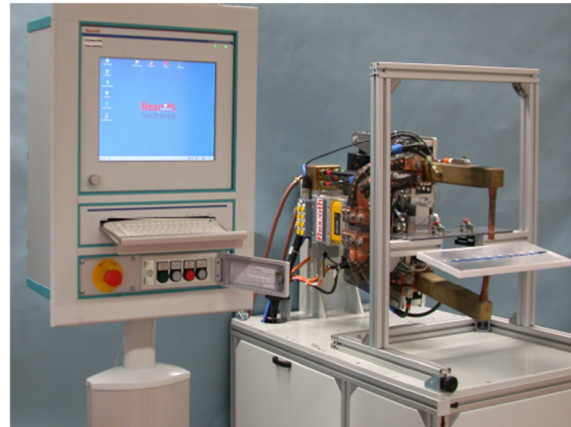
Resistance (spot) element welding equipment at LWF
